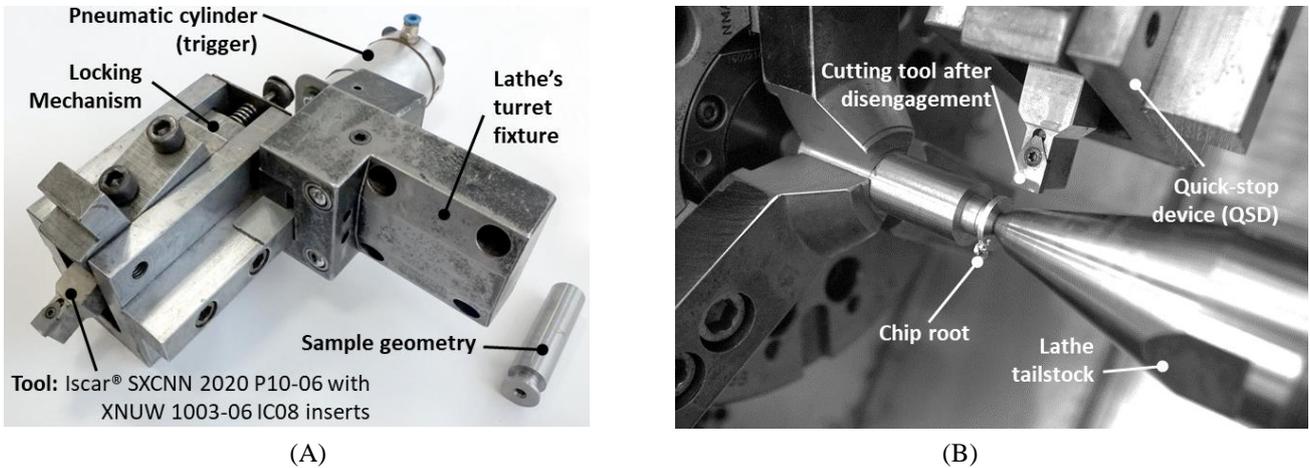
In-house developed pneumatic quick-stop device used in the tests (A) and example of a chip root obtained after disengagement of cutting tool (B).
